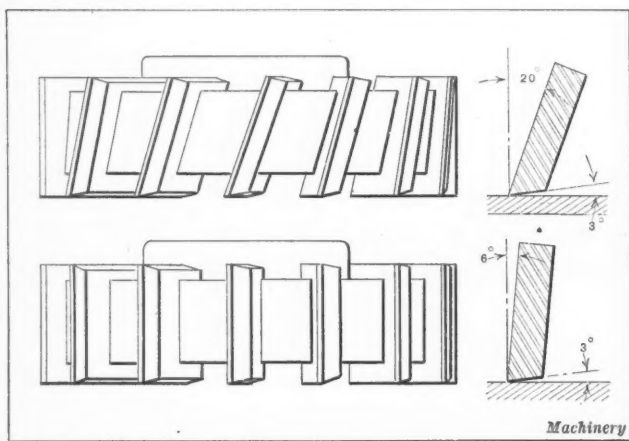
Advantage of setting the Blades at a Comparatively Slight Angle in Inserted-tooth Milling Cutters
